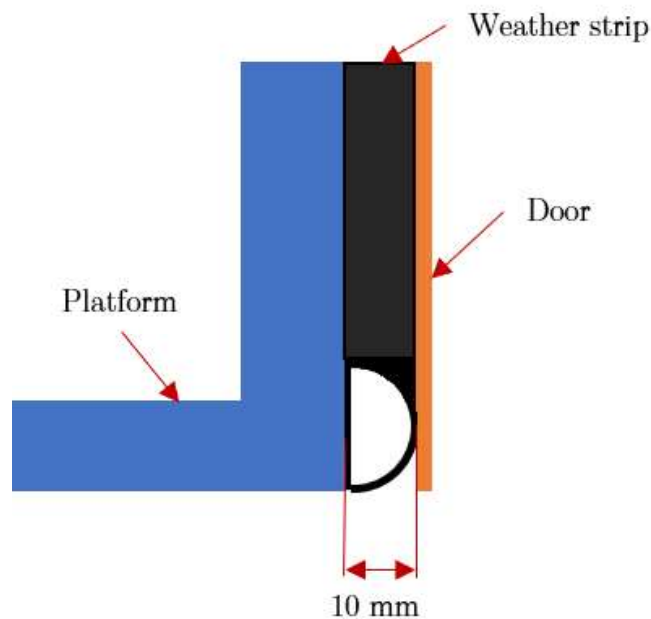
SEAL BETWEEN DOOR STRUCTURE AND PLATFORM
